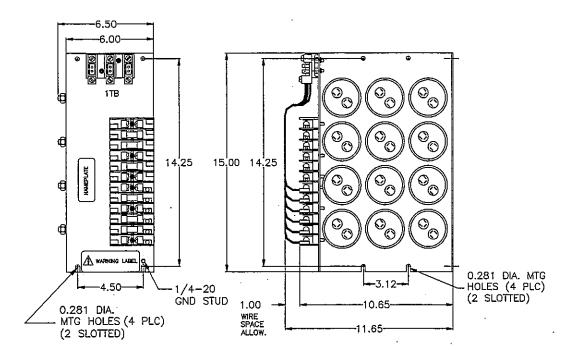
100 HP, 480 VAC Capacitor Assembly Outline Drawing
